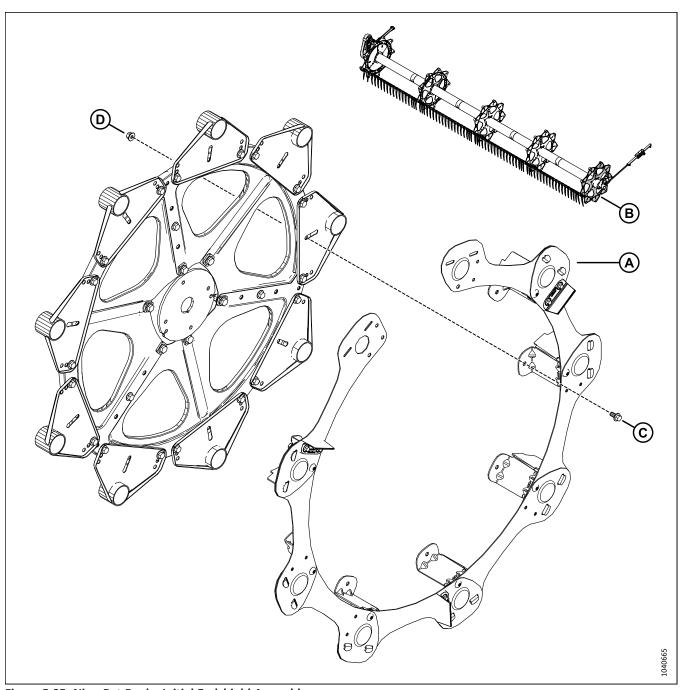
Nine-Bat Reel – Initial Endshield Assembly
